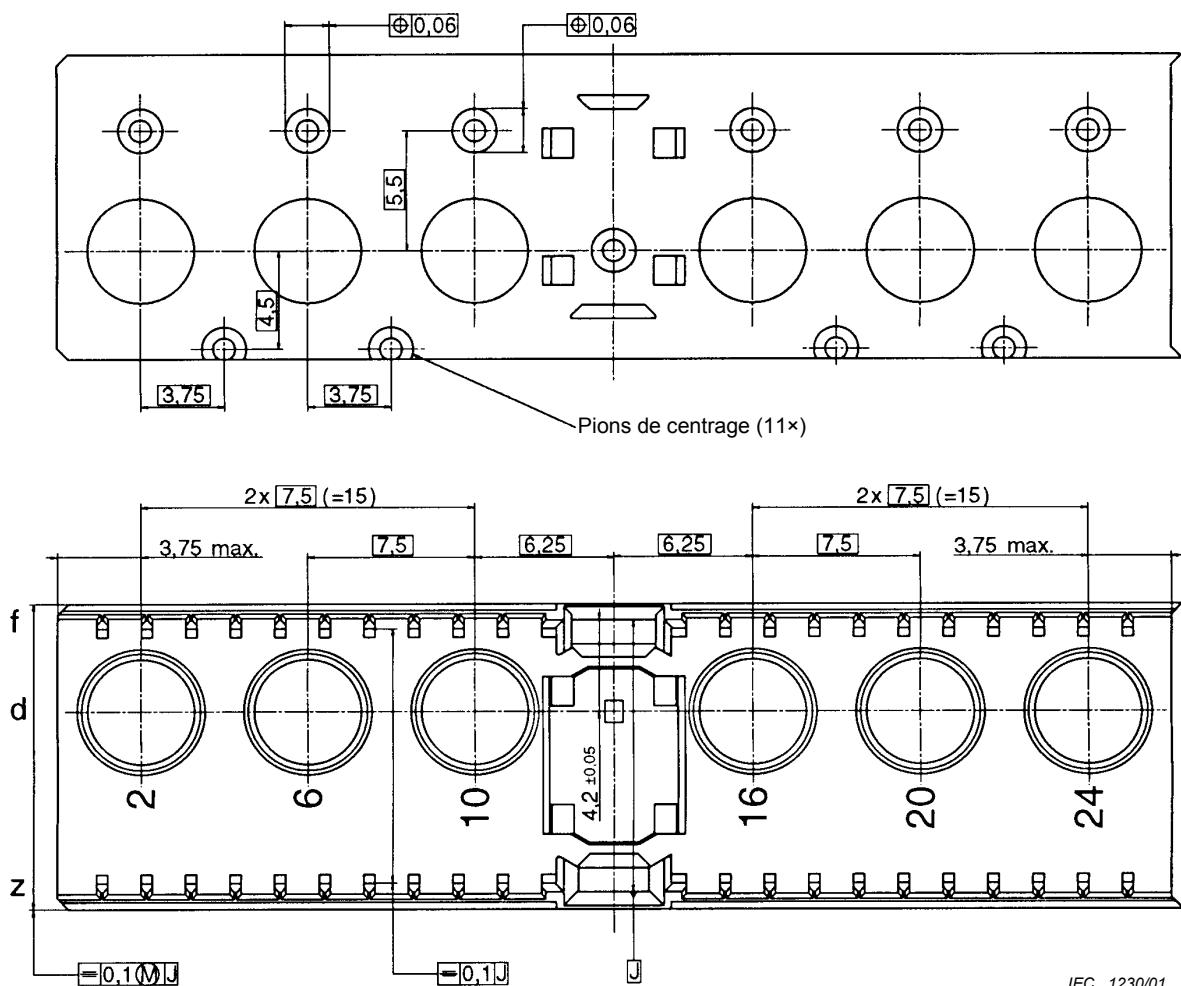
Dimensions of style F, fixed 25 mm extension module
